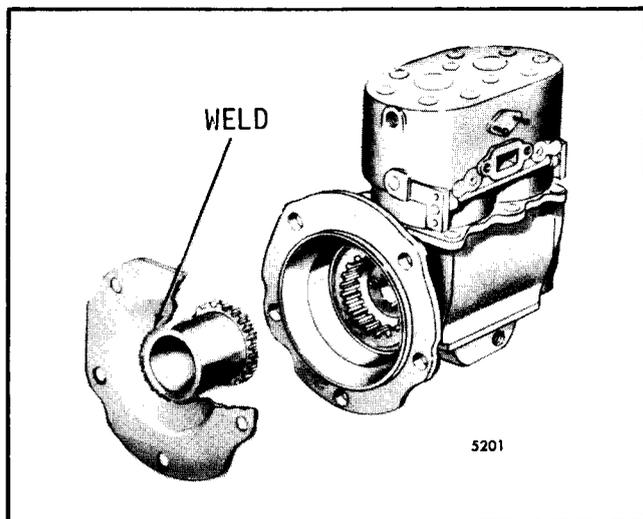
Fixture For Holding Drive While Installing or Removing Slotted Nut
